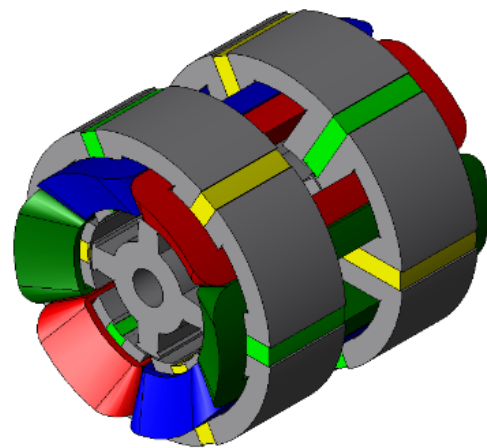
3D view of the dual-stator 6/4 FSPM machine
